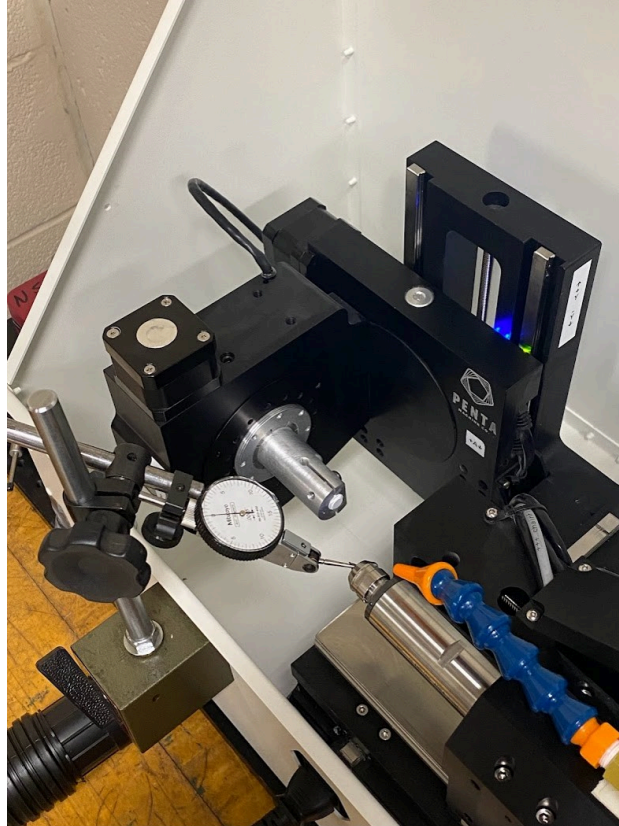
PNC V2-50 inside an enclosure mounted to a lab bench with the chip blower and vacuum outlet modifications. Indicator measuring tool runout in between tool changes with a BSG frit mounted in the fixture.
